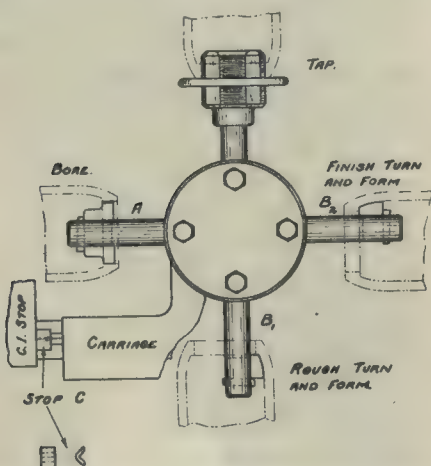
TOOLS FOR FINISHING INSIDE OF NOSE.
